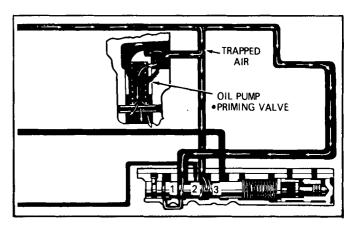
F-19 Oil Pump Priming Valve Circuitry
